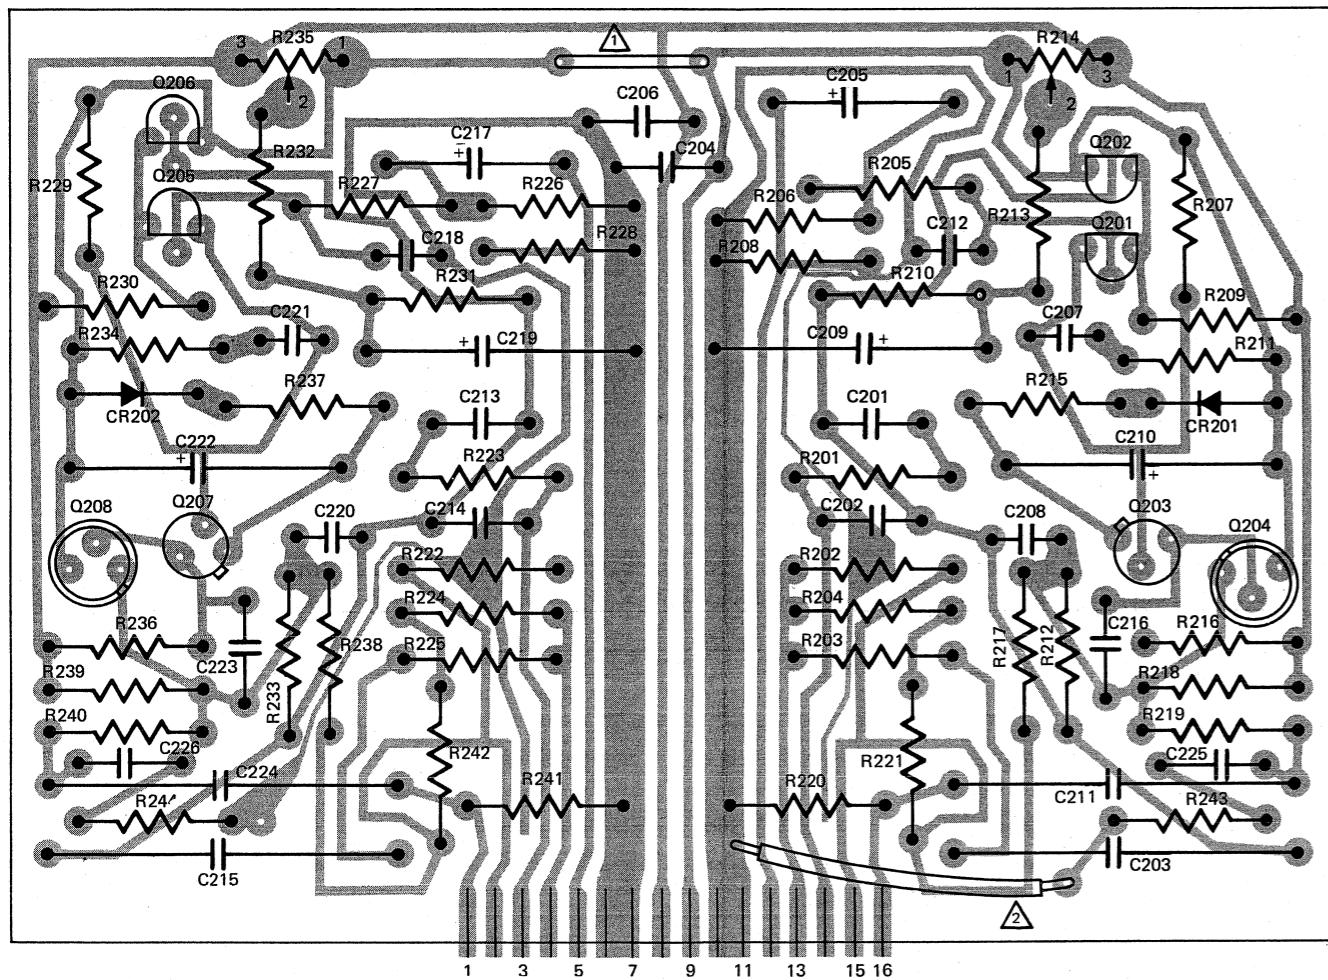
Phono Amplifier Board – A2 Component Assembly Diagram
